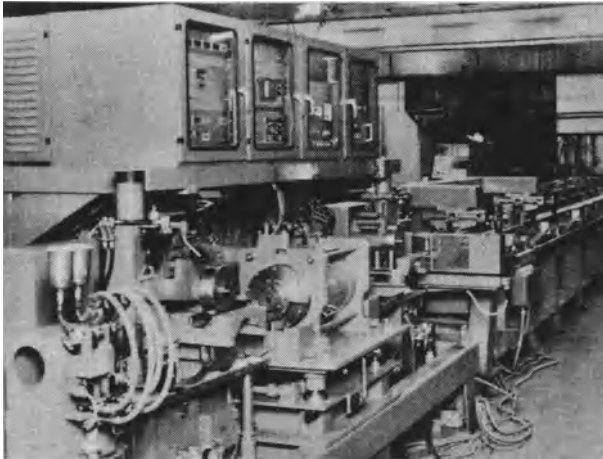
Rod-testing machine with rotating probes for testing of rods up to 80 mm in diameter for longitudinal surface cracks (design Krautkrämer)
